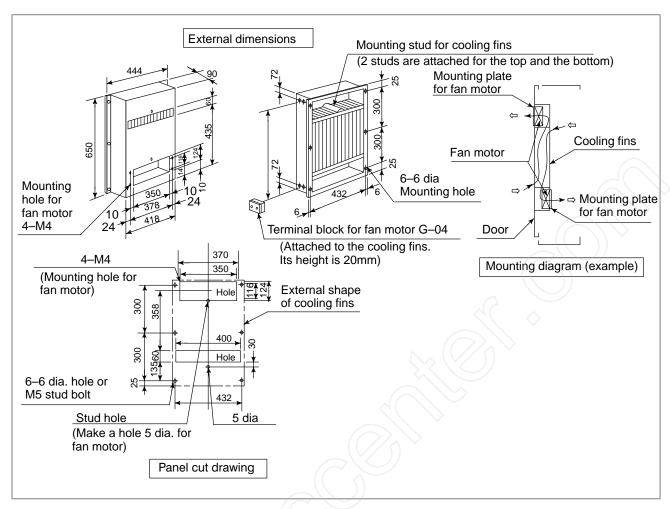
(d) External dimension and mounting method of cooling fin B (A02B-0053-K304)
